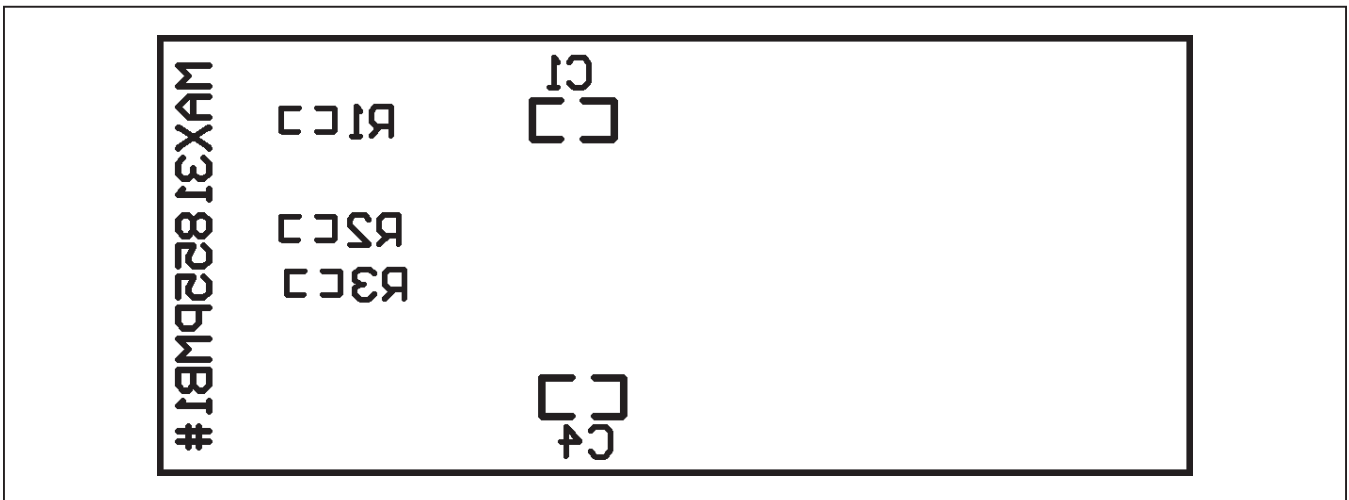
MAX31855PMB1 Peripheral Module Component Placement Guide—Solder Side
